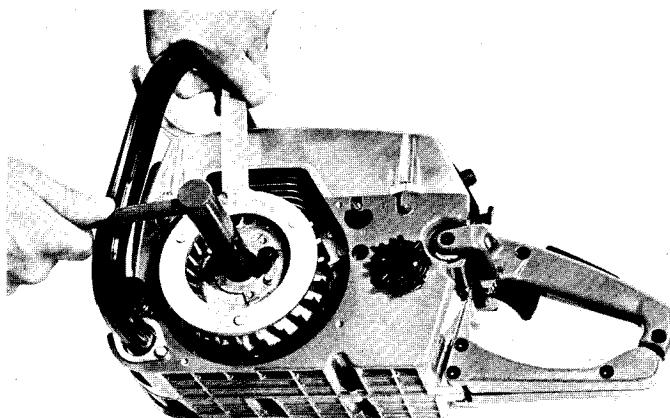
To loosen the flywheel nut use socket wrench no. 9098-1 and counterhold no. 9106-1. Re-tighten later to torque of 25 lb.ft. (3.5 kpm).
